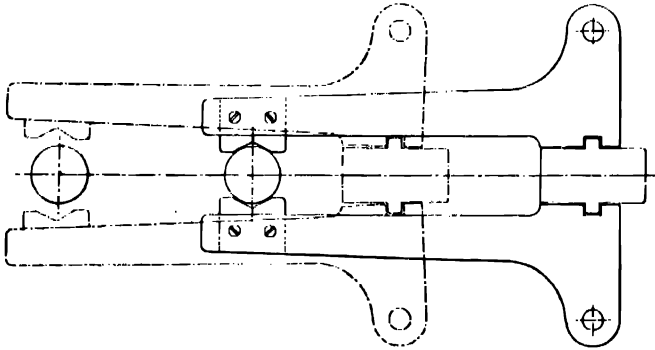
Feed fingers which receive piece from a feed tube, and transfer it to the die.
